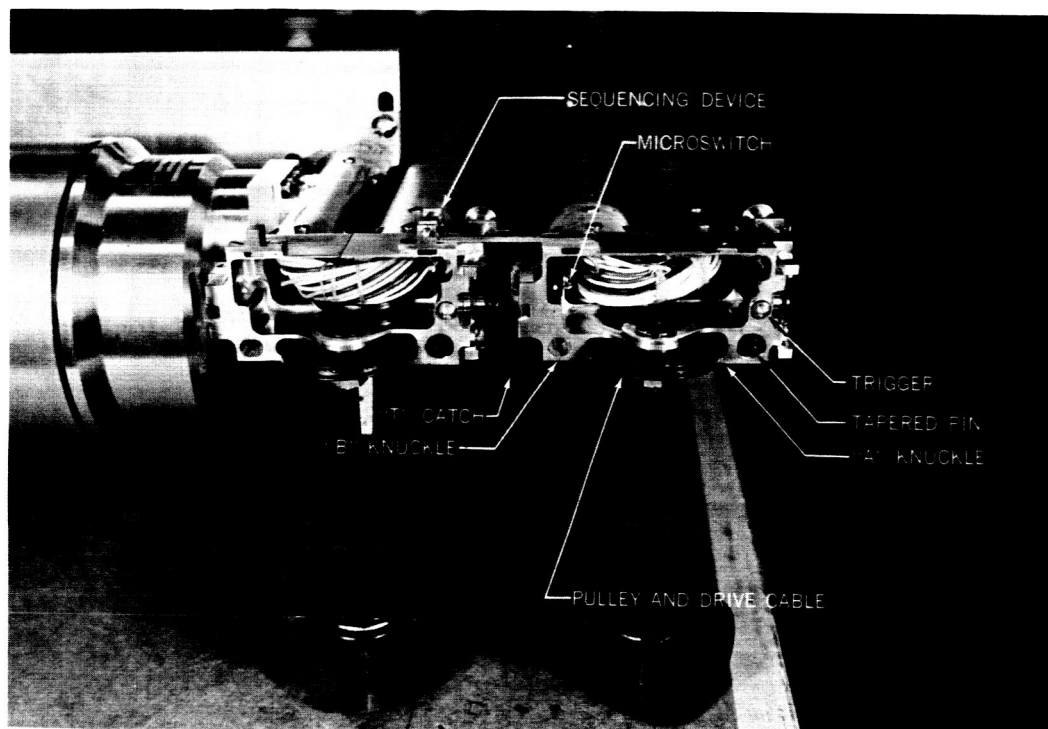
Details of the triggered knuckle lock and internal passage of the electrical cable.
